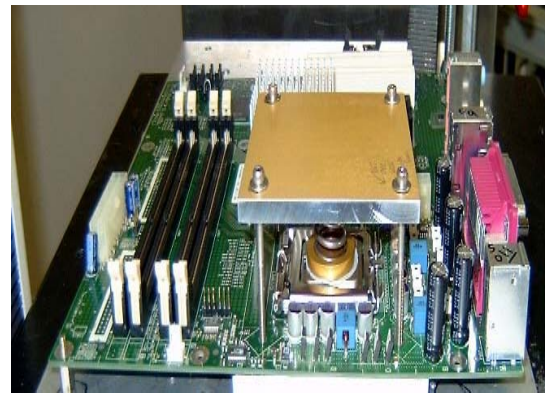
MTB test board with sockets, FC BGA and simulated enabling loads on components of interest
